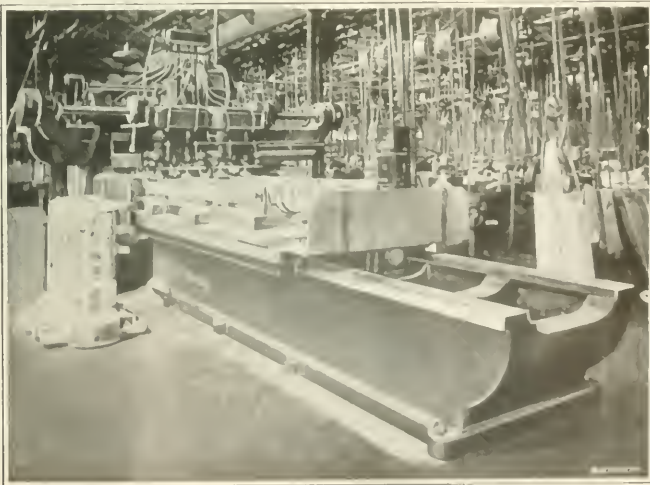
Ingersoll Planer Type of Milling Machine on which First Operation is performed on Crank-cases
